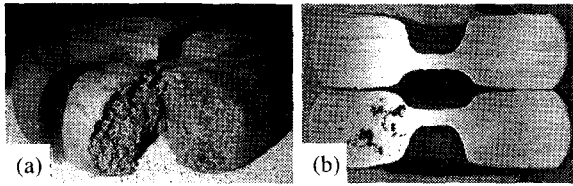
Exterior(a) and interior(b) cracking of hot forged bearing steel owing to overheating at 1220
